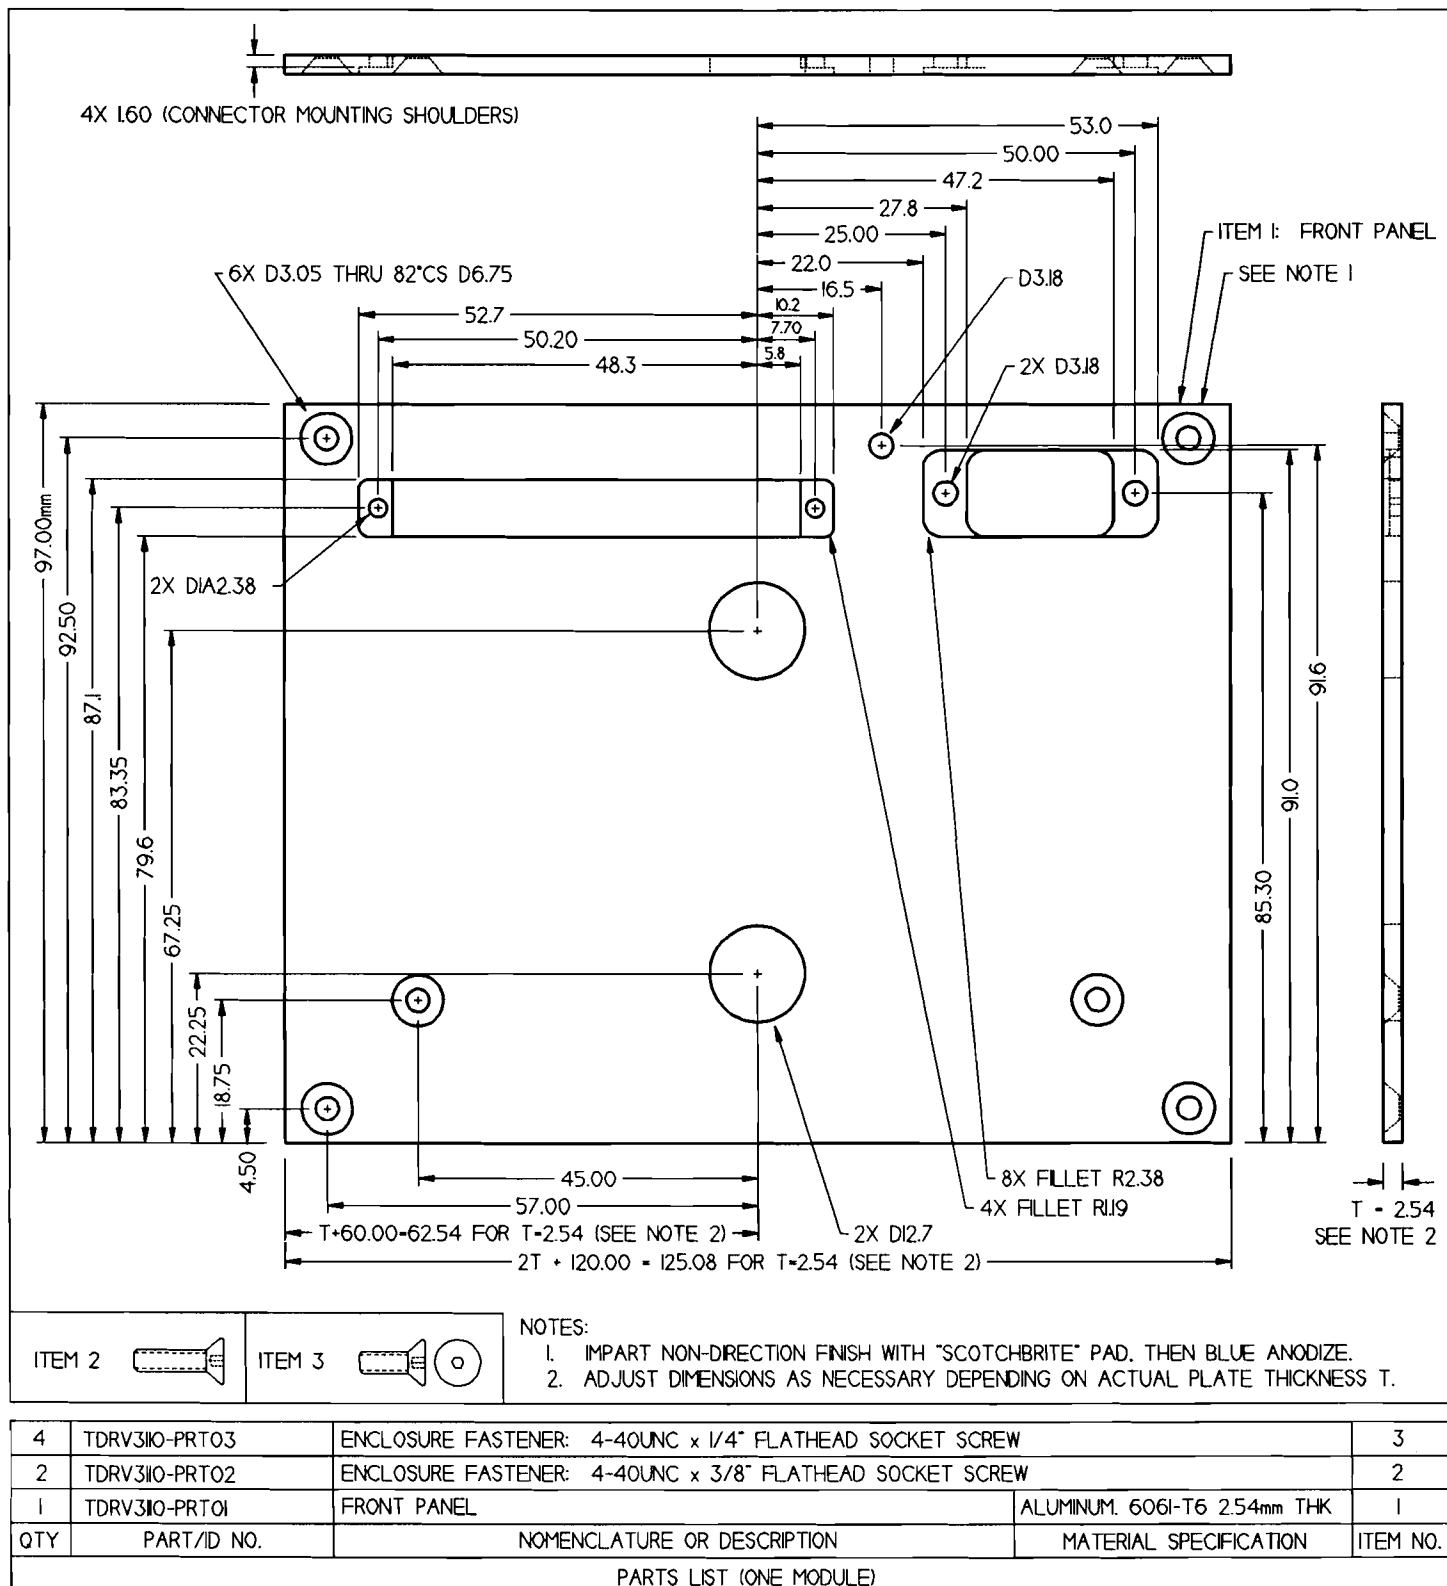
Modified front enclosure plate required to mount the new PCB-version of PWM controller card within the valve enclosure. (Dwg. TDRV3110.GCD)
